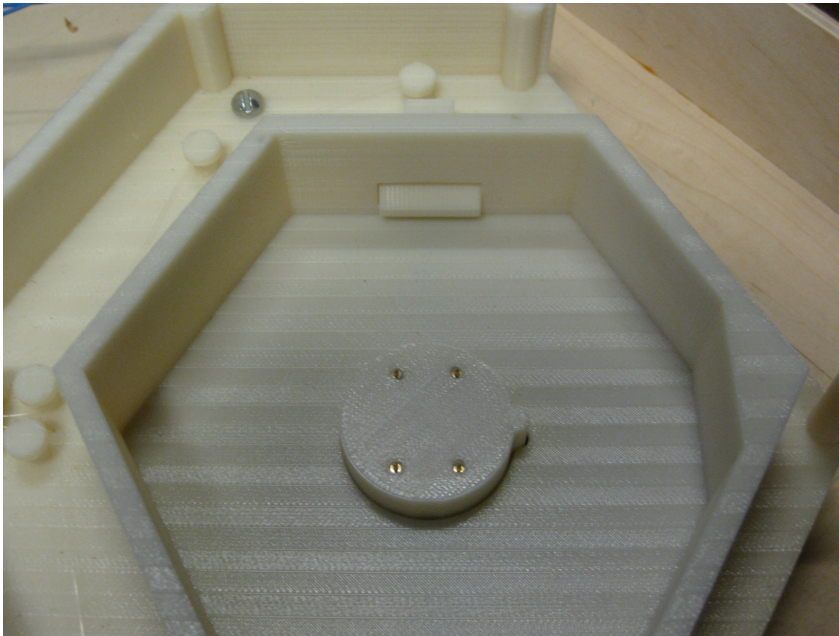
A close up of the latch that holds the object in the socket. The circular piece in the middle acts to push the object out of the socket when it is being removed and will be the site of the electrical connections between the socket and object.
